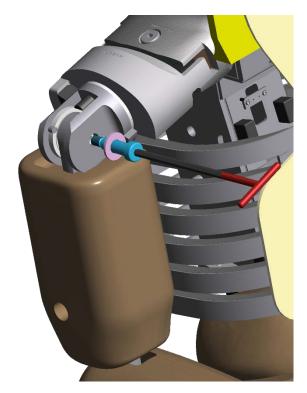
Removing the arm assembly at the shoulder yoke
